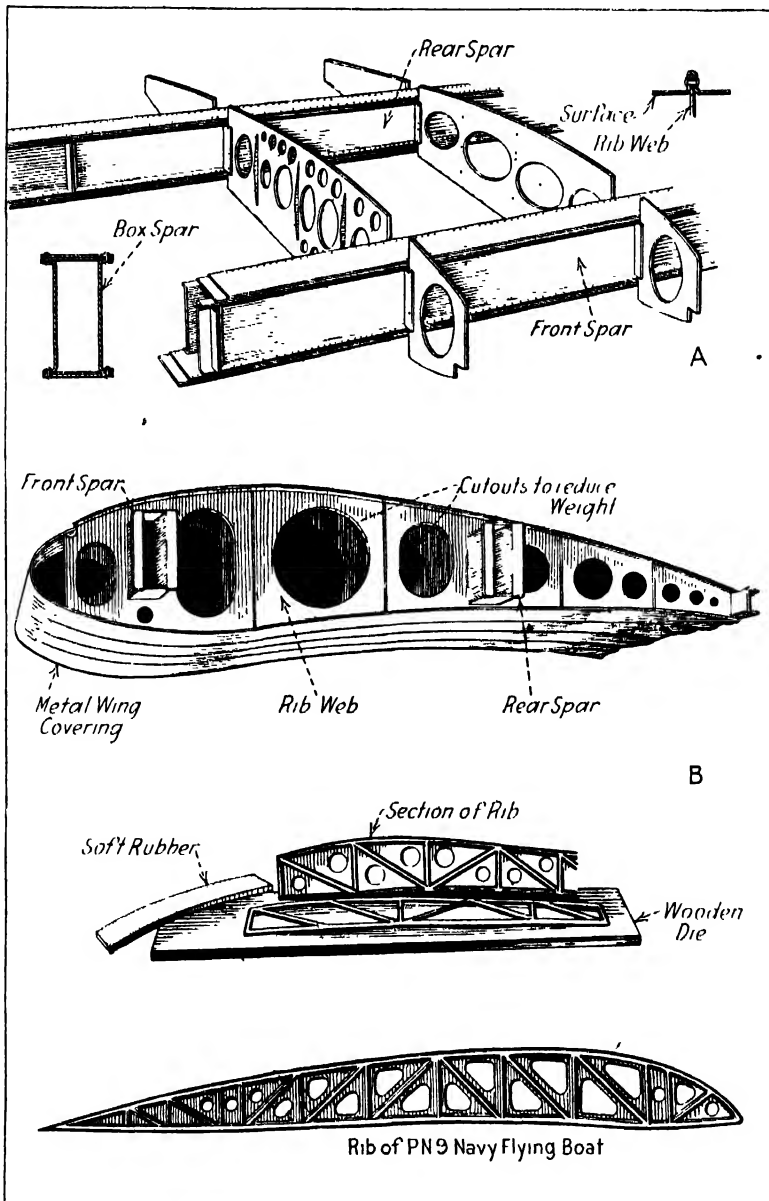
Methods of Metal Wing Rib Construction. A—Composite Structure Built from Pieces cut out of Duralumin Sheet. B—Wing Rib Stamped from Sheet Metal by Simple Wood Dies Used in Navy Experimental Work.
